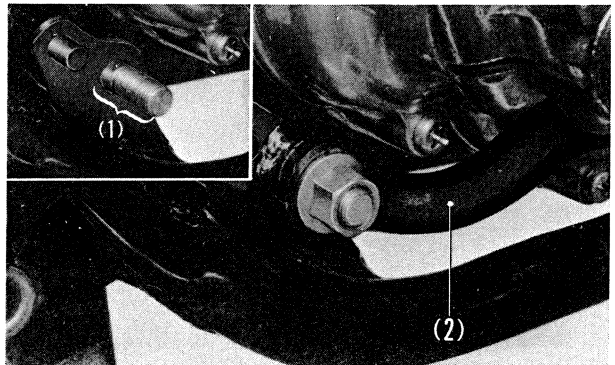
(1) Engine rear hanger bolts (Threaded parts are identical in length.) (2) Foot rest
